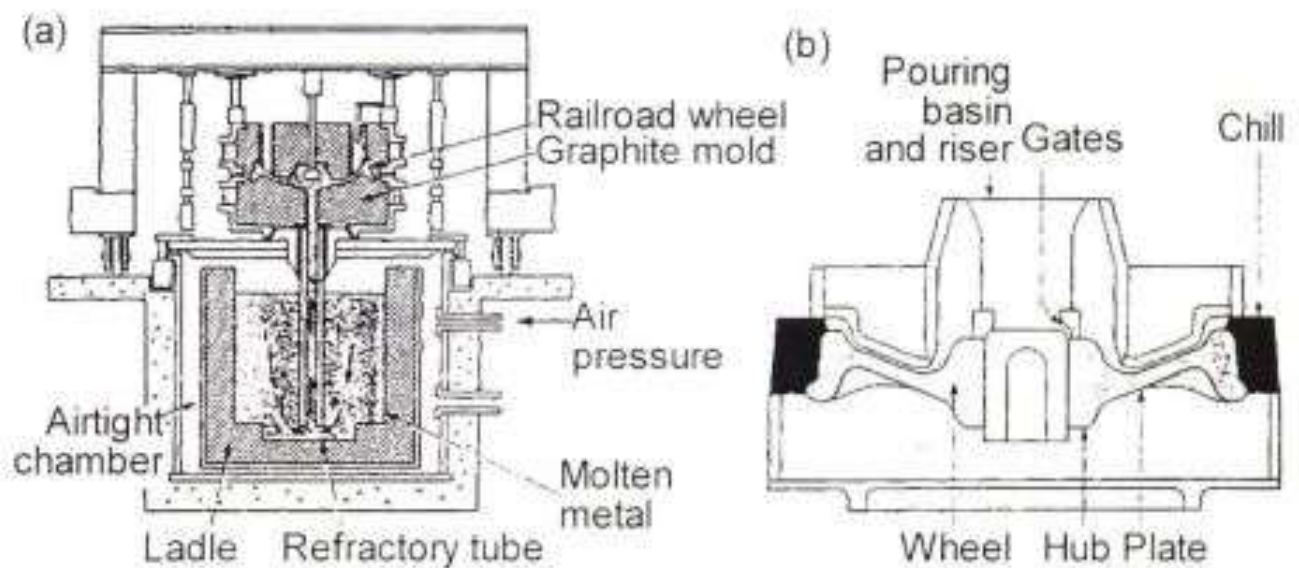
(a) Bottom-pressure casting process utilizes graphite molds for the production of steel railroad wheels. (b) Gravity-pouring method of casting a railroad wheel
